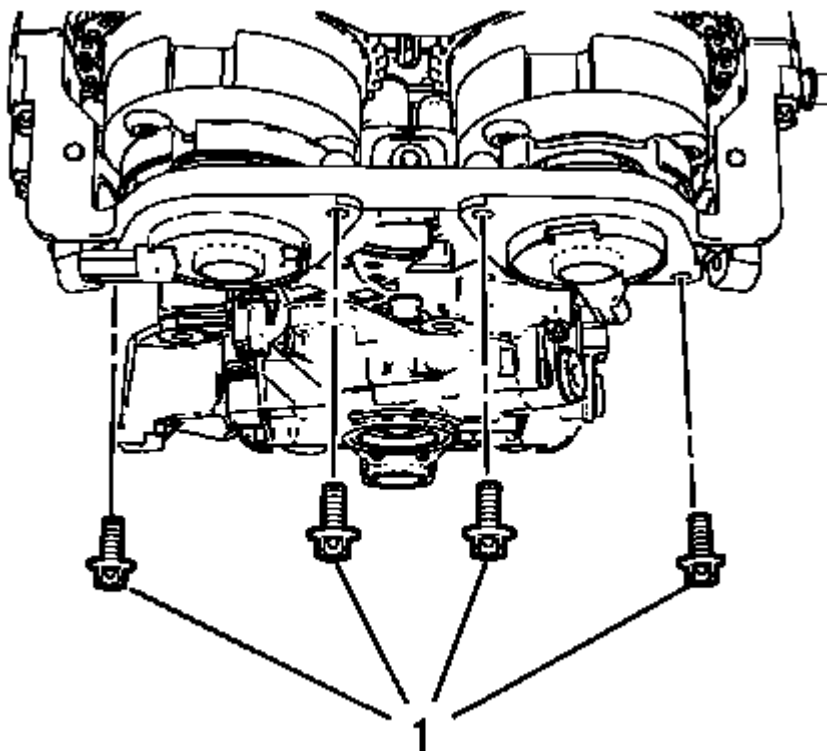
Camshaft Position Actuator Solenoid Valve Bolts
